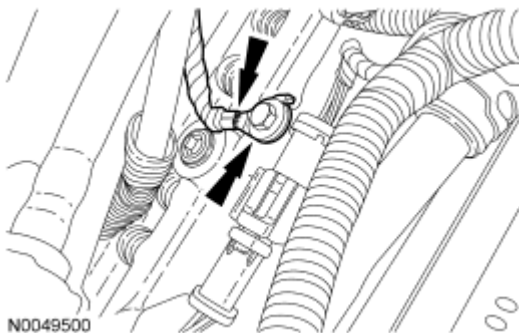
Identifying Ground Wire From Rear Of LH Cylinder Head
